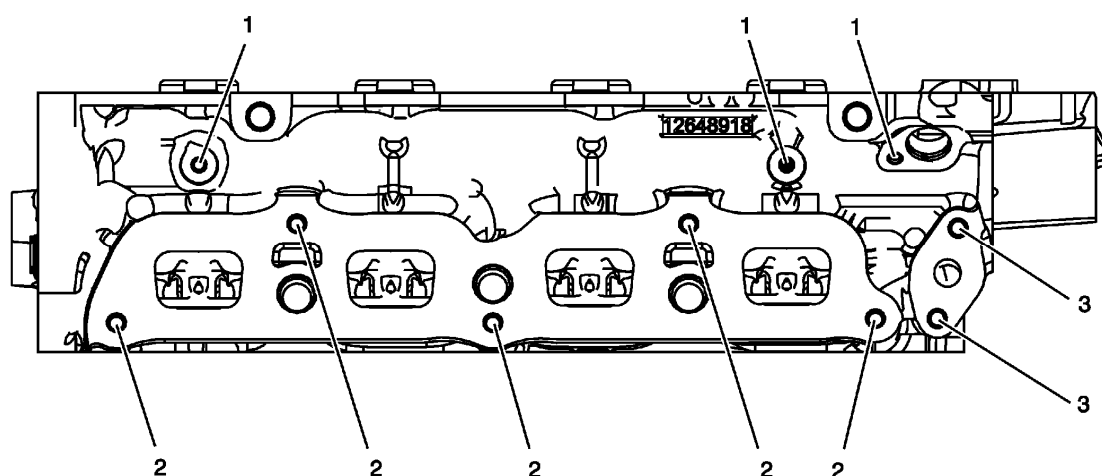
Cylinder Head Left Side View -- Exhaust Manifold Deck Face
